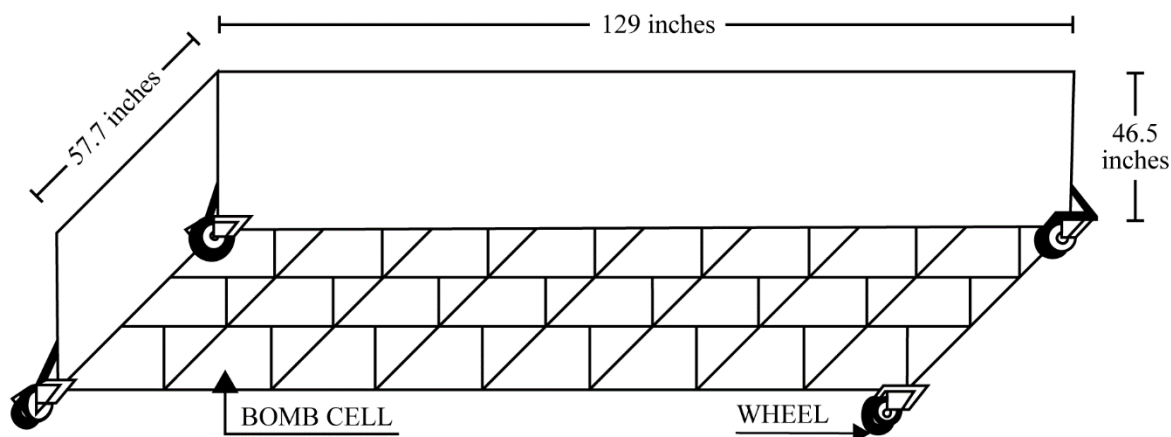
Dispenser, 900-pound, Bomb, XMC-1 - Line Drawing
